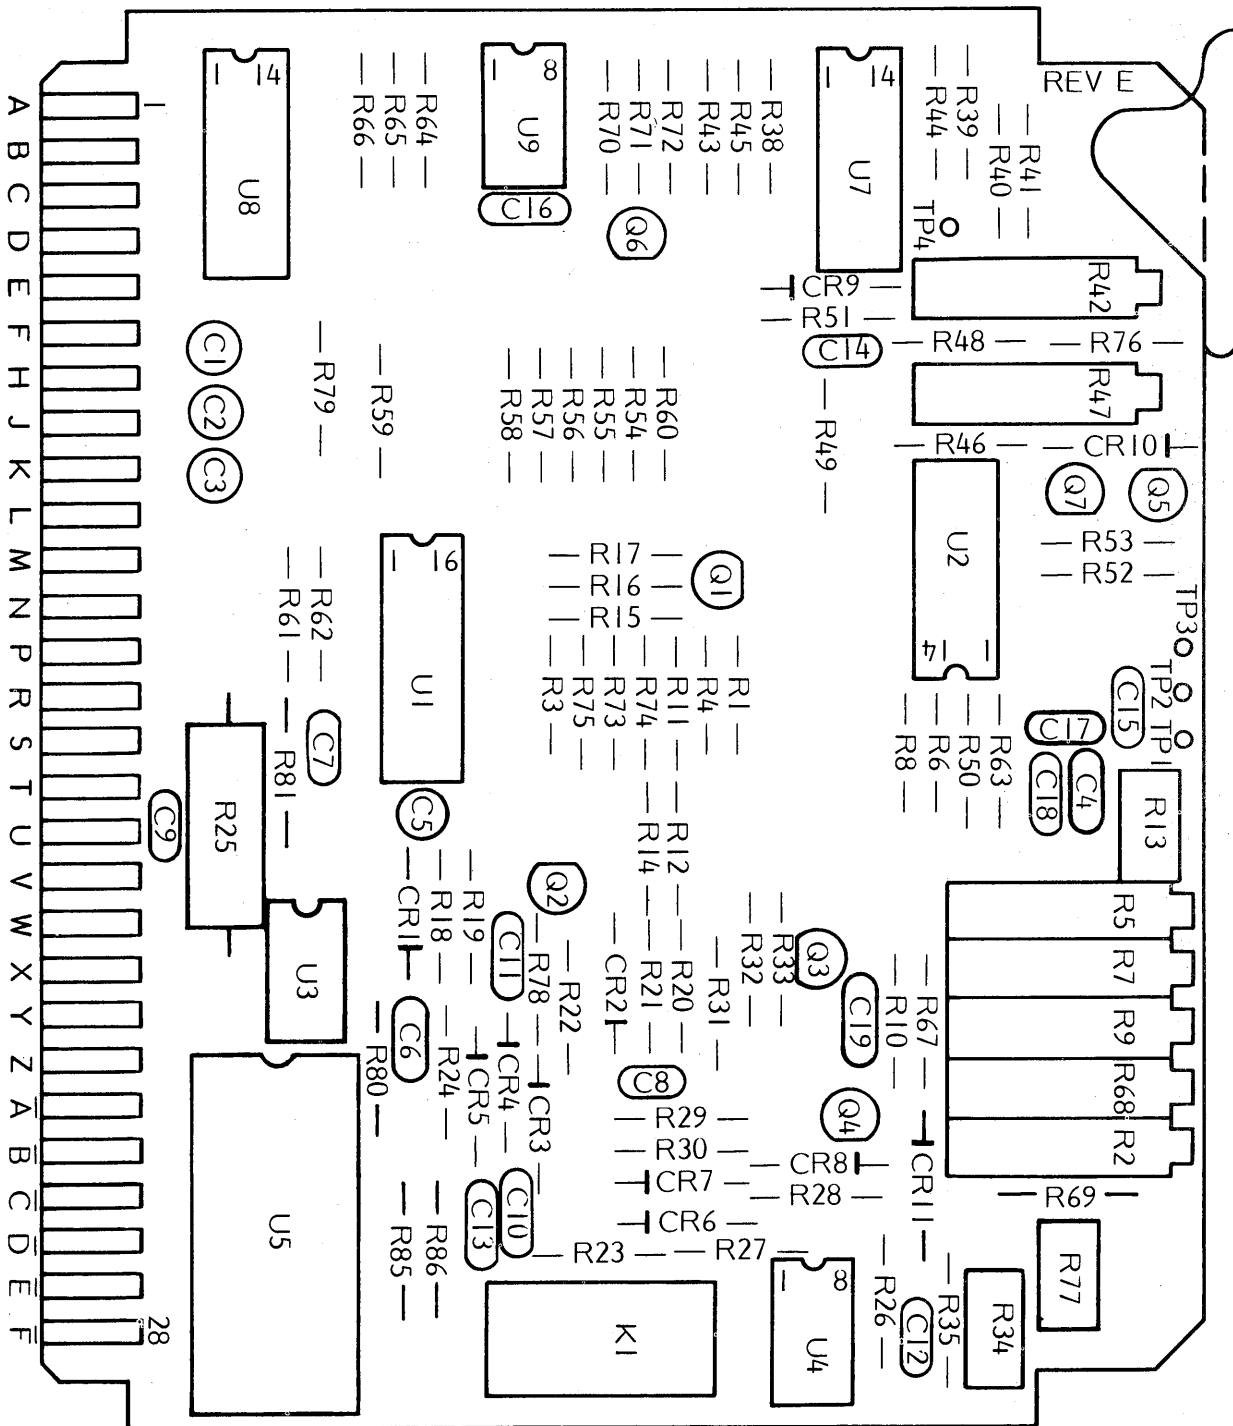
A7 YIG Driver PCB, Ass'y 660-D-8191, Schematic (Sheet 2 of 3)
